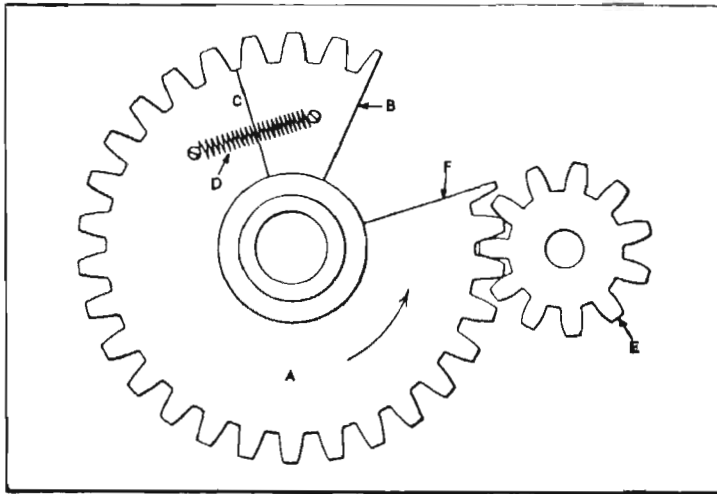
Intermittent Motion Derived from a Swinging Gear Sector
